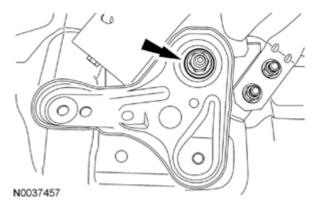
Locating Rear Subframe Nut Courtesy of FORD MOTOR CO.
